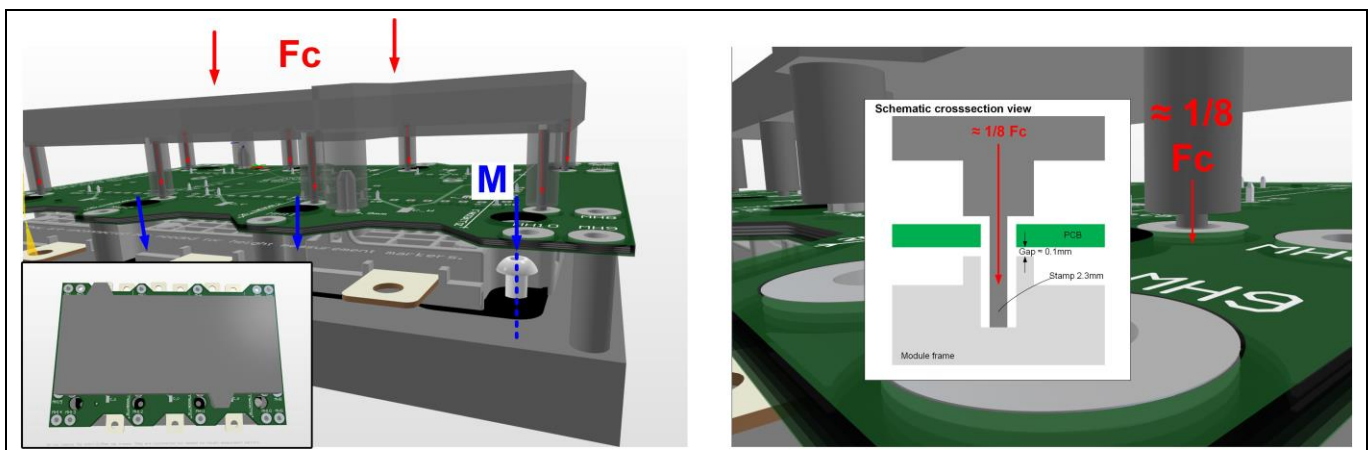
Module clamping with force F_c during the baseplate screw process. The shown clamping tool uses 2.3mm (-0.1) stamps in blind holes of the frame dome to apply the force directly to the module. The clamping tool does not apply a force to the PCB.
